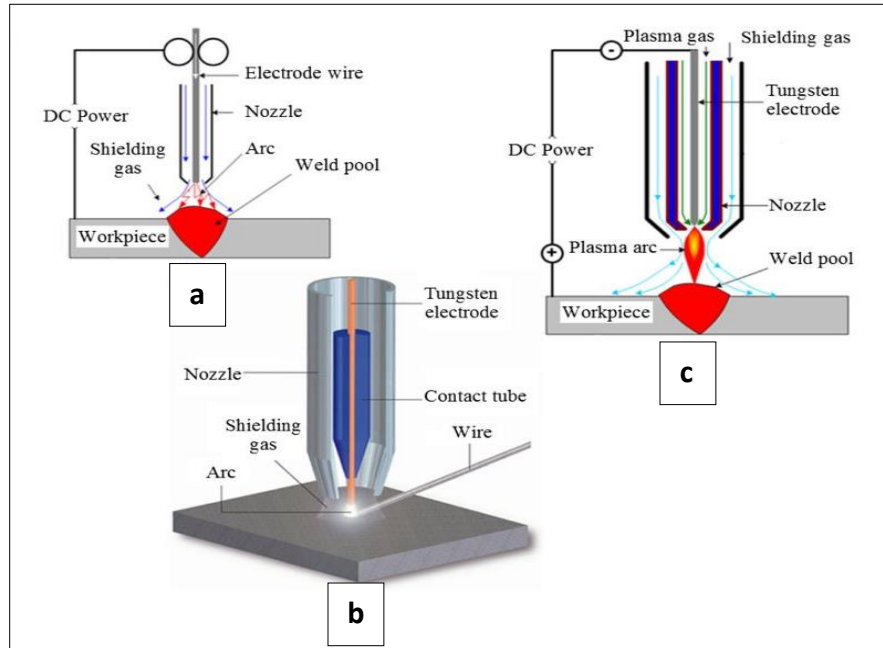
Schematic of WAAM process equipped with different welding torches: (a) GMAW, (b) GTAW, (c) PAW [12].
